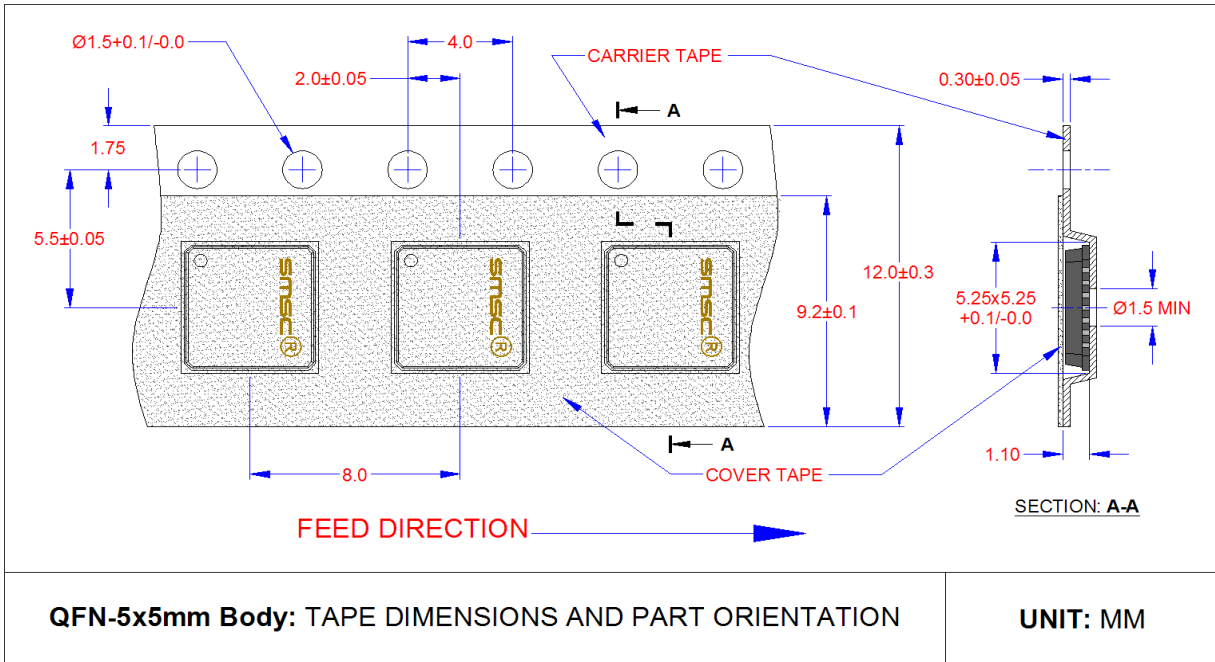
28-Pin Package Tape Dimensions and Part Orientation (mm)
